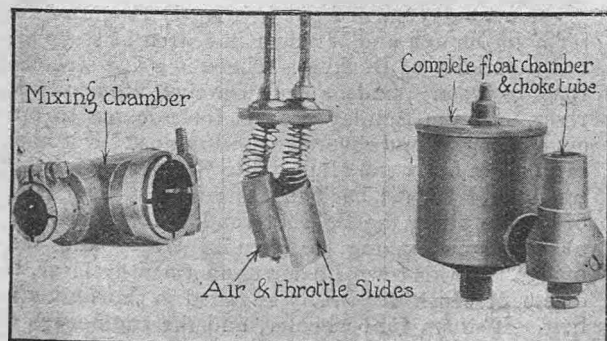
The throttle and air slides, mixing chamber (left), float chamber and choke tube (right).
